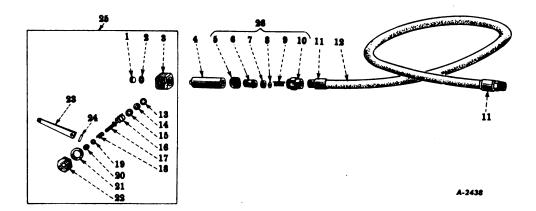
DETAIL PARTS OF BUCKET LUBRICATOR - Continued
